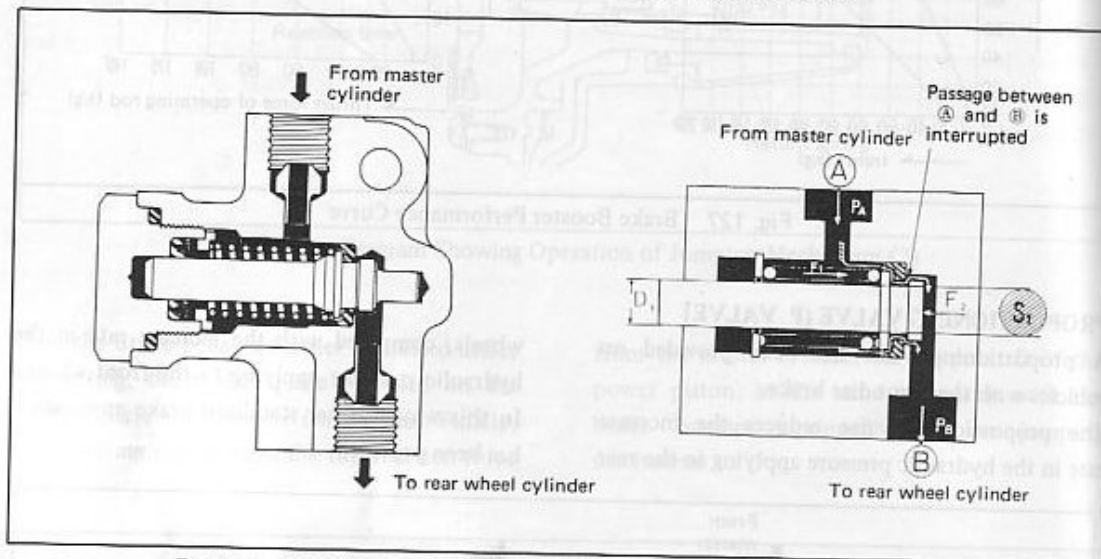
Condition in Which Pressure Control Valve (Piston) is Stationary
